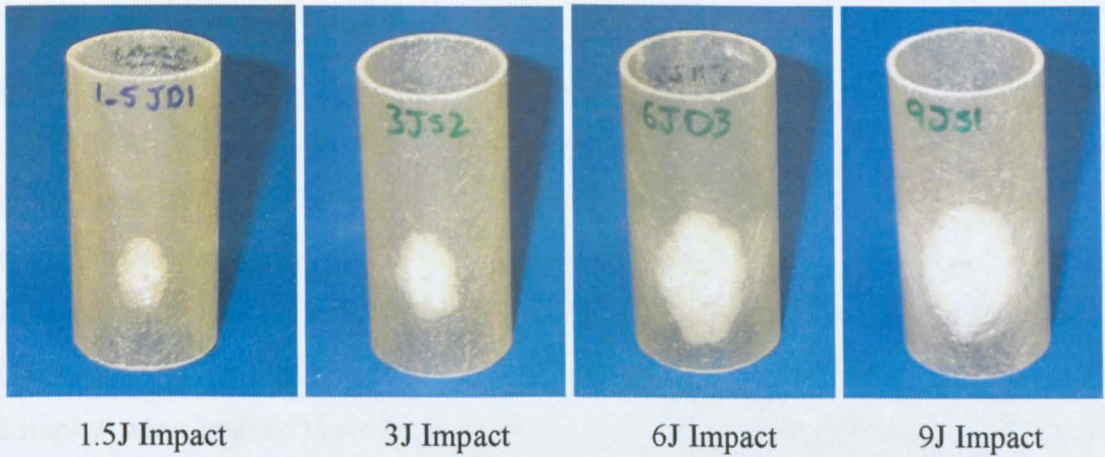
Impacted small CoFRM tubes pre-testing
